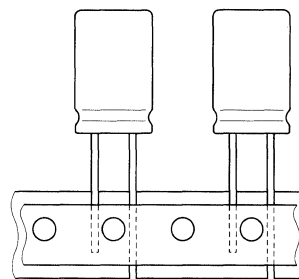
Form CB, cut leads; see Table 2 for dimensions.
